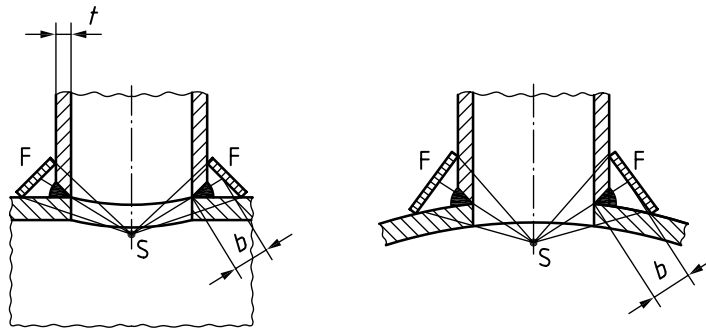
Arrangement for testing of set-on welds with a radiation source, located on the central pipe axis and perpendicular to the weld centre, and the film outside
